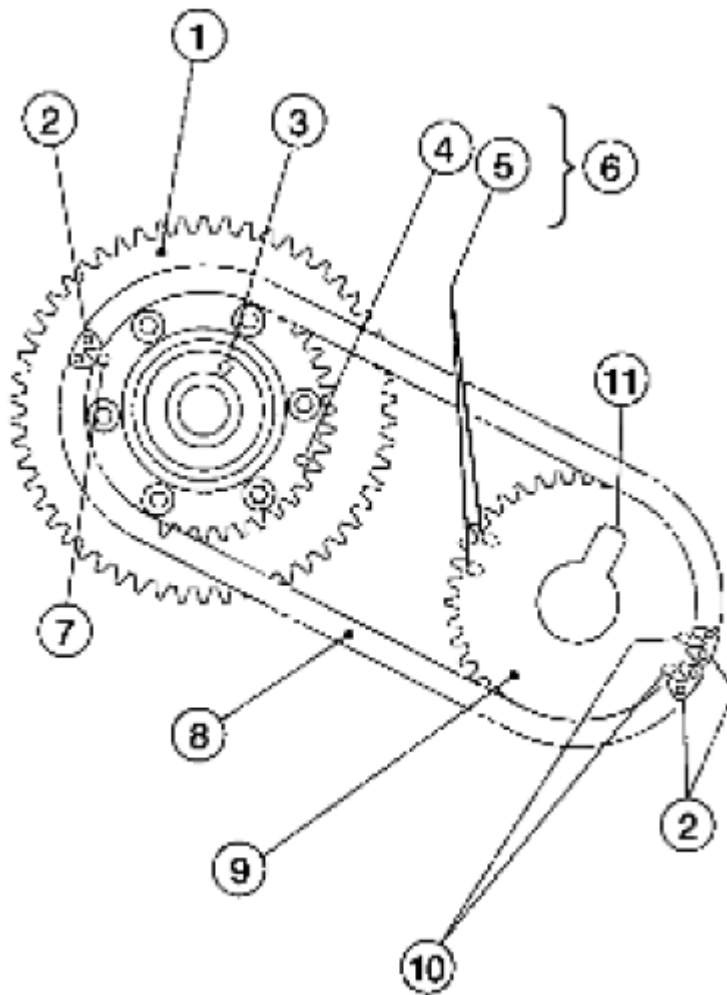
Identifying Timing Chains And Camshaft Sprockets
